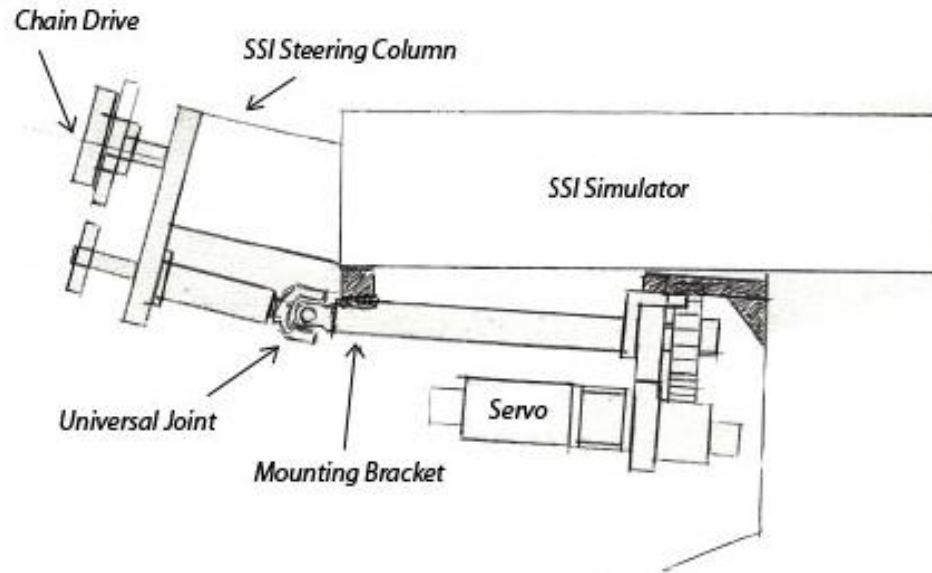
SSI/AEVIT Integration (courtesy of Matt Wills)
